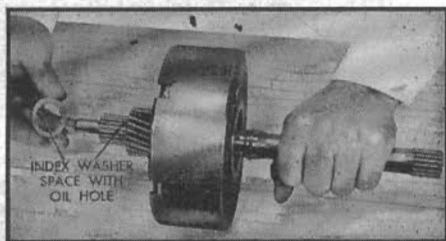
Alignment of thrust washer oil slot with shaft oil hole. 1950-59
